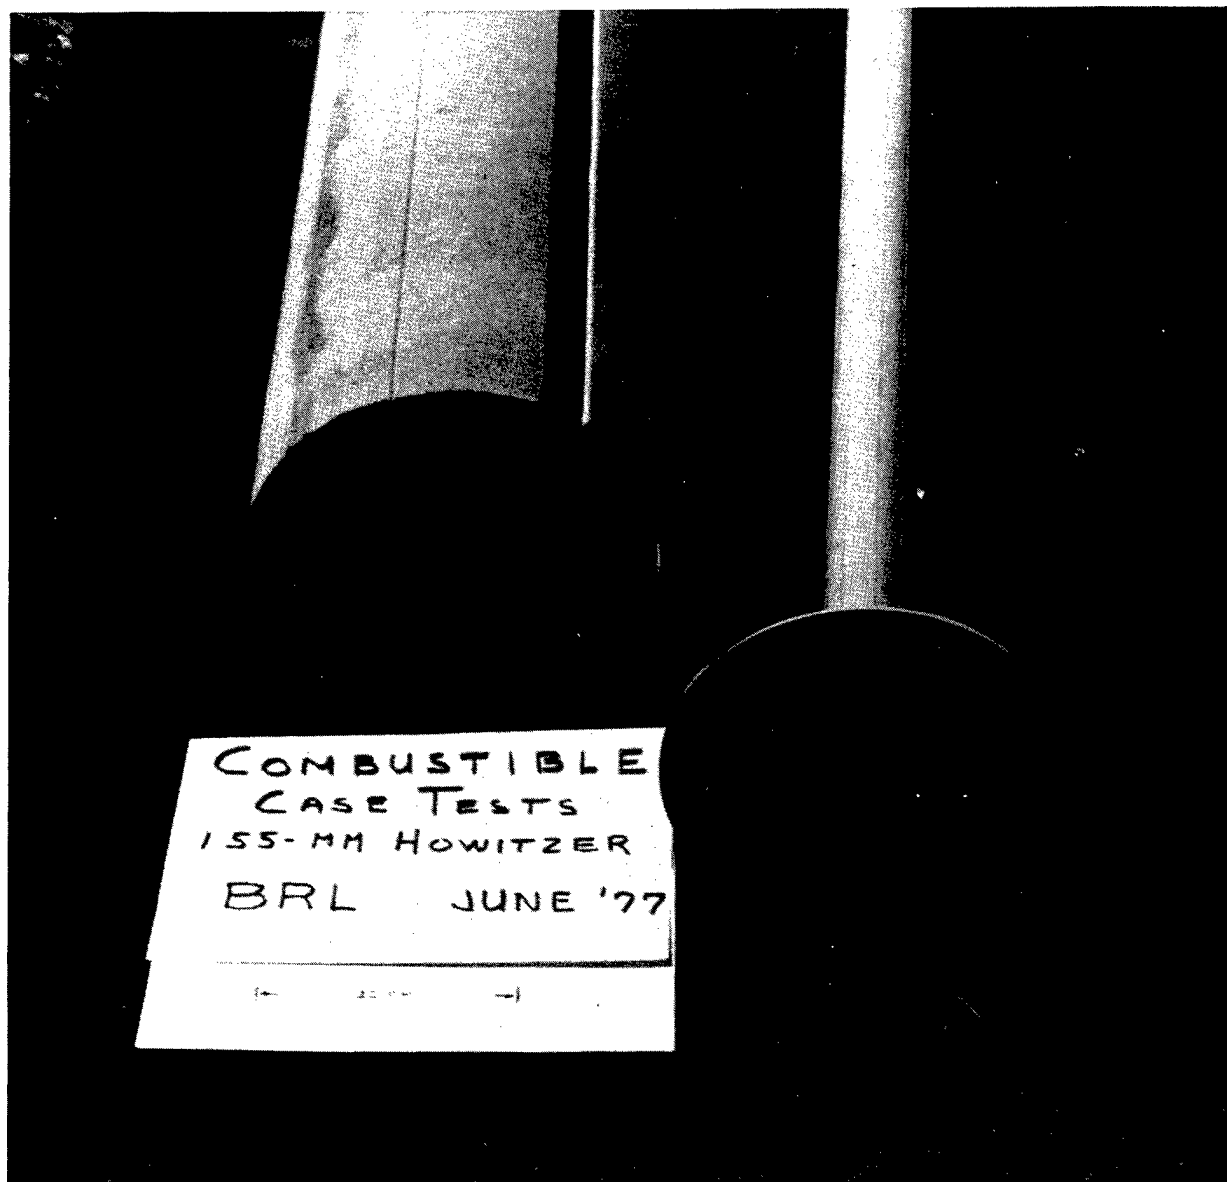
End View of Consumable Case Sidewall, End Piece, and Centercore Tube Before Assembly.
